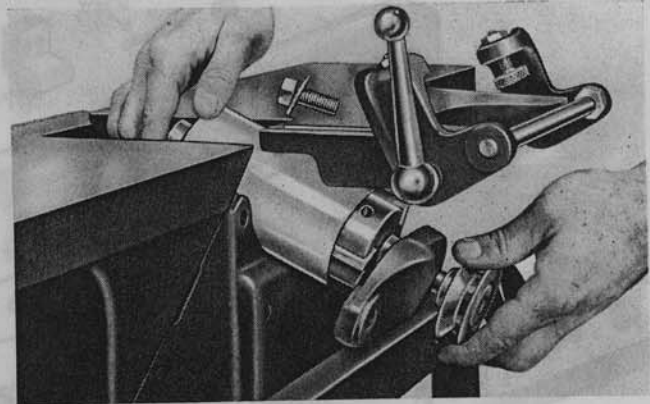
Entire cutterhead can be removed so that blades can be sharpened in the cutterhead.
